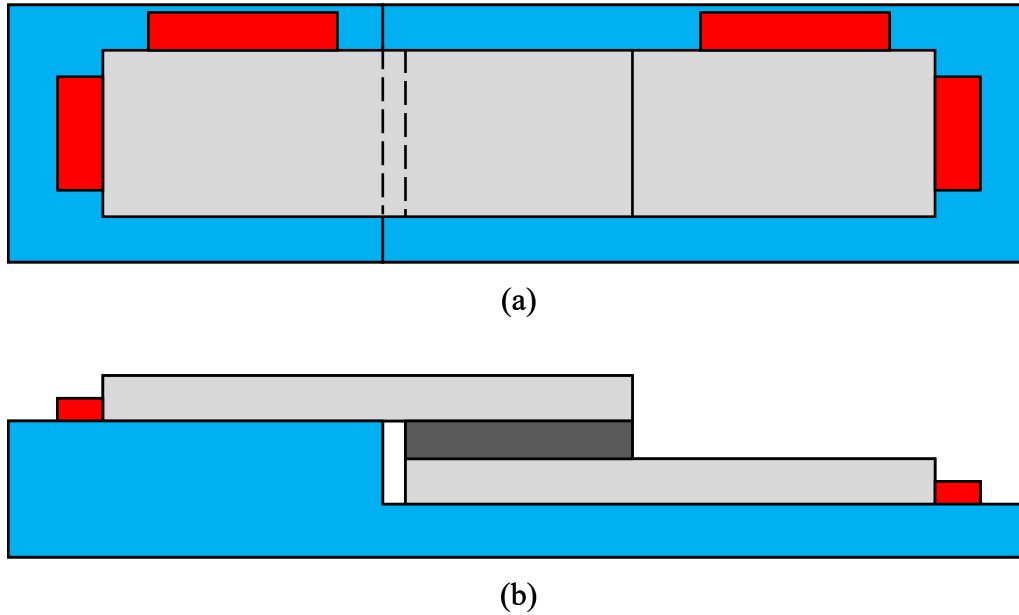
SLJ Jig Fixture: (a) top view; (b) side view
